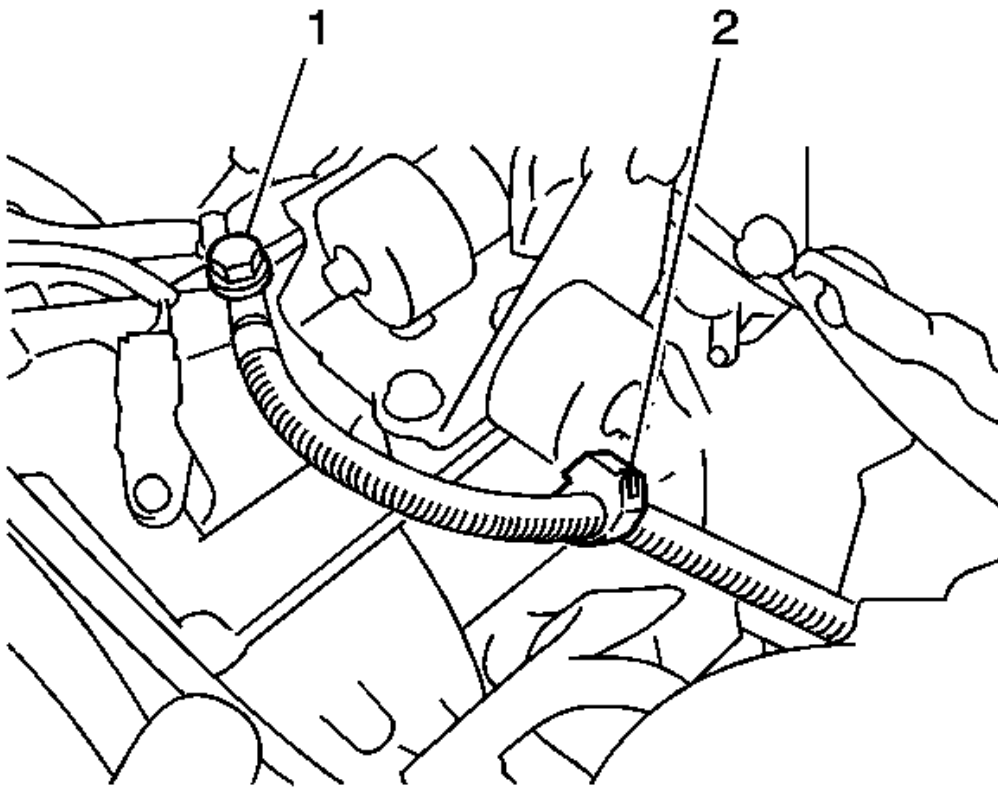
Identifying Bolt & Clamp (Automatic Transaxle)
